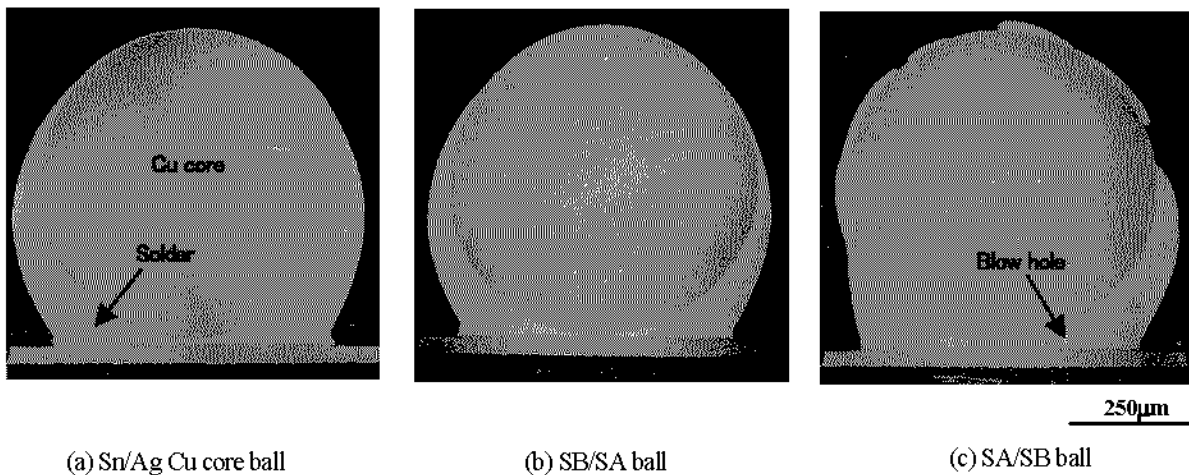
General images of cross section of BGA joints using (a) Sn/Ag Cu core ball, (b) SB/SA ball and (c) SA/SB ball after reflow soldering
